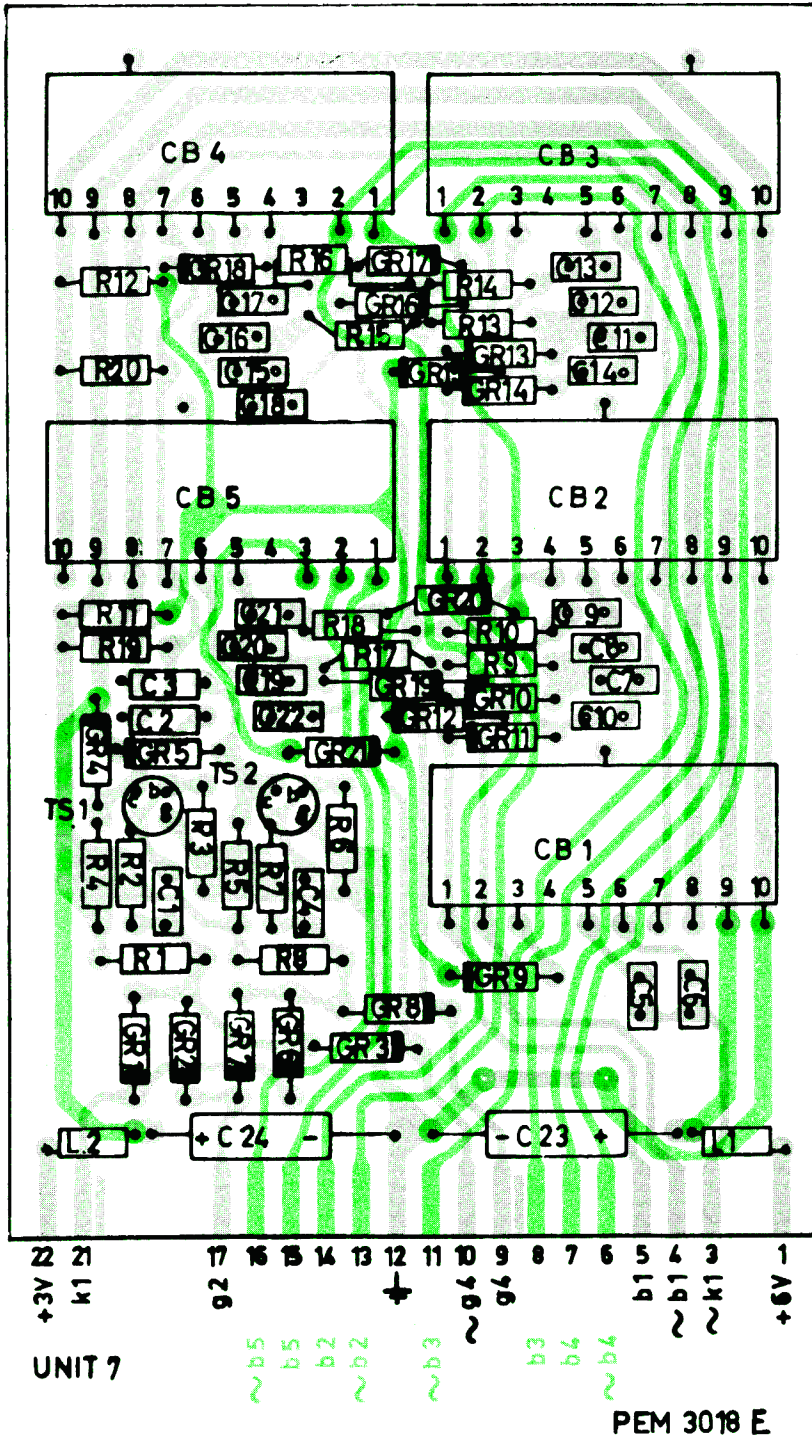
Printed wiring board, line register (E version), Unit 7
